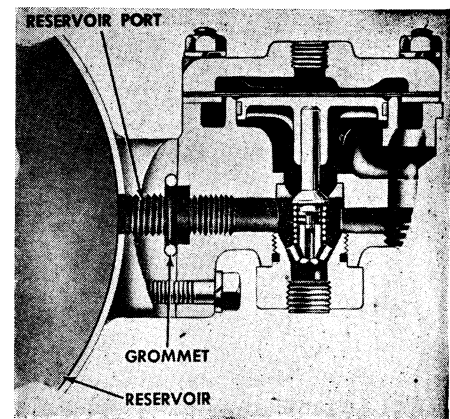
Sectional view of Type RE-1 Relay Emergency Valve mounted on reservoir
